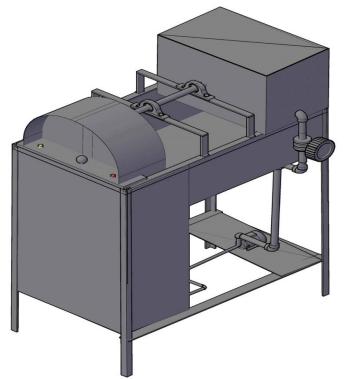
(3-D) Isometric drawing of the End view of the Pelton wheel impulse turbine
